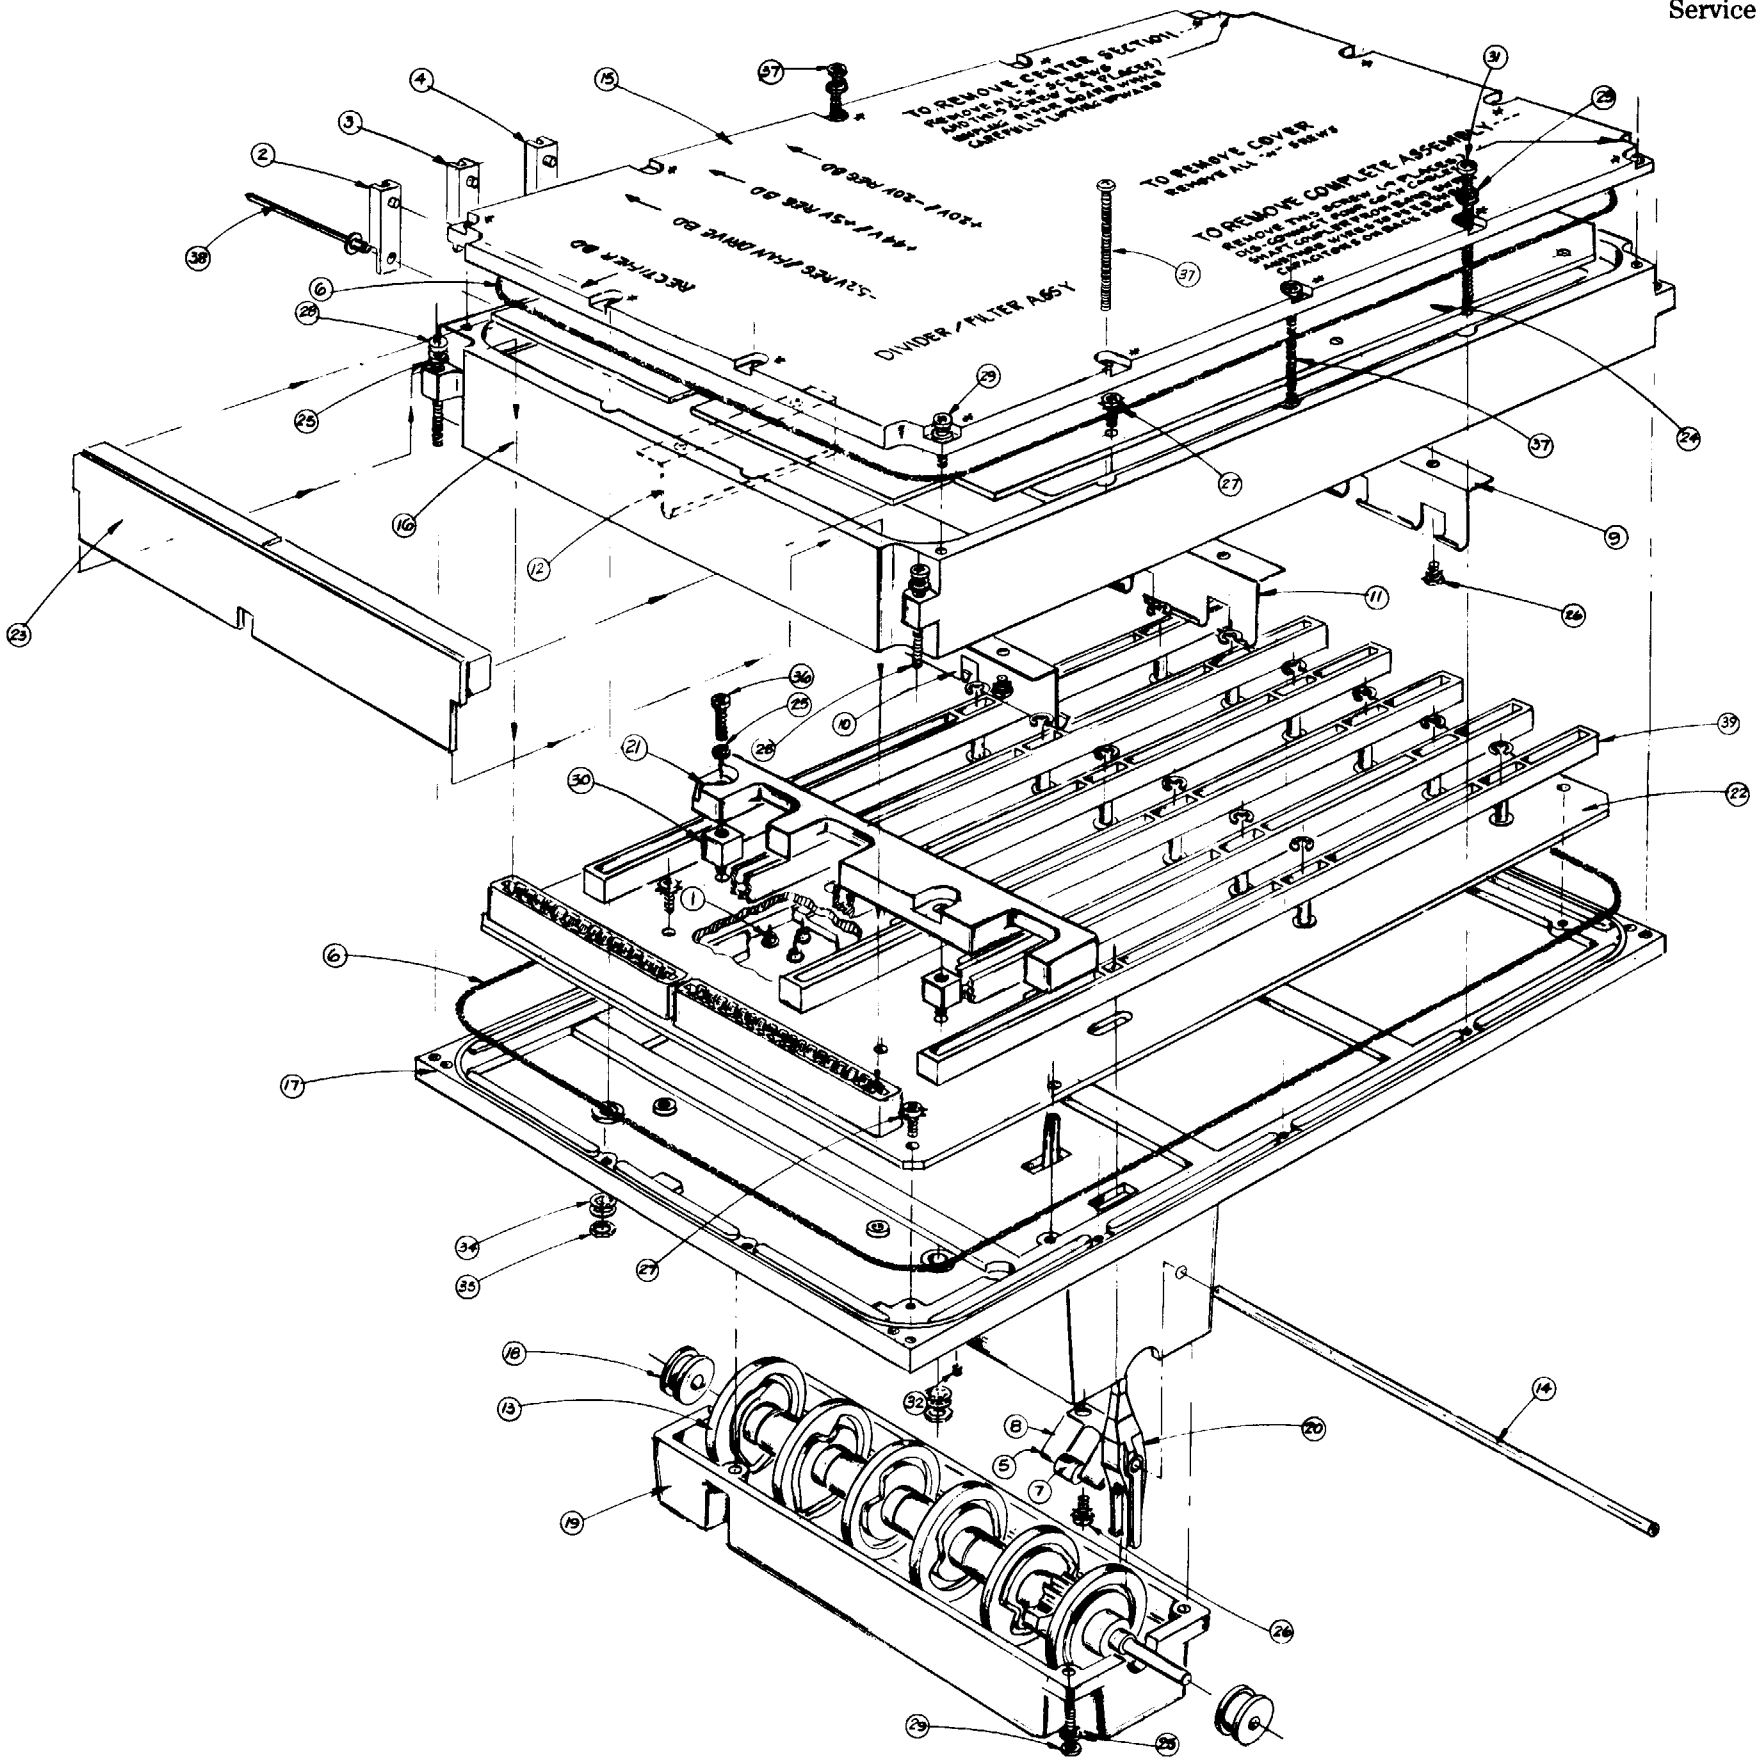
A10 Divider/Filter Assembly Illustrated Parts Breakdown
